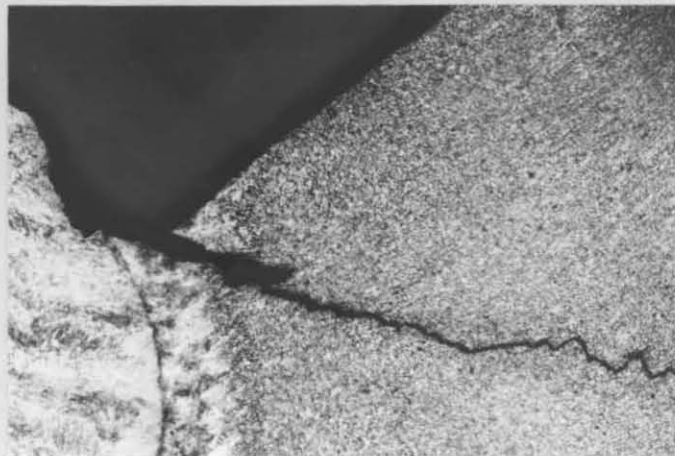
Partially fractured bead-on-plate 3CR12Ni bent specimen with the notch tip located in the weld metal. Note the short ductile crack (specimen tested at 90°C) extending from the notch tip through the weld metal into the HT HAZ (75X).
